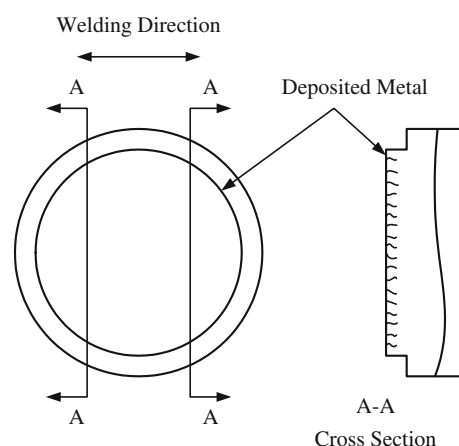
Observational sketch of thermal fatigue cracks
